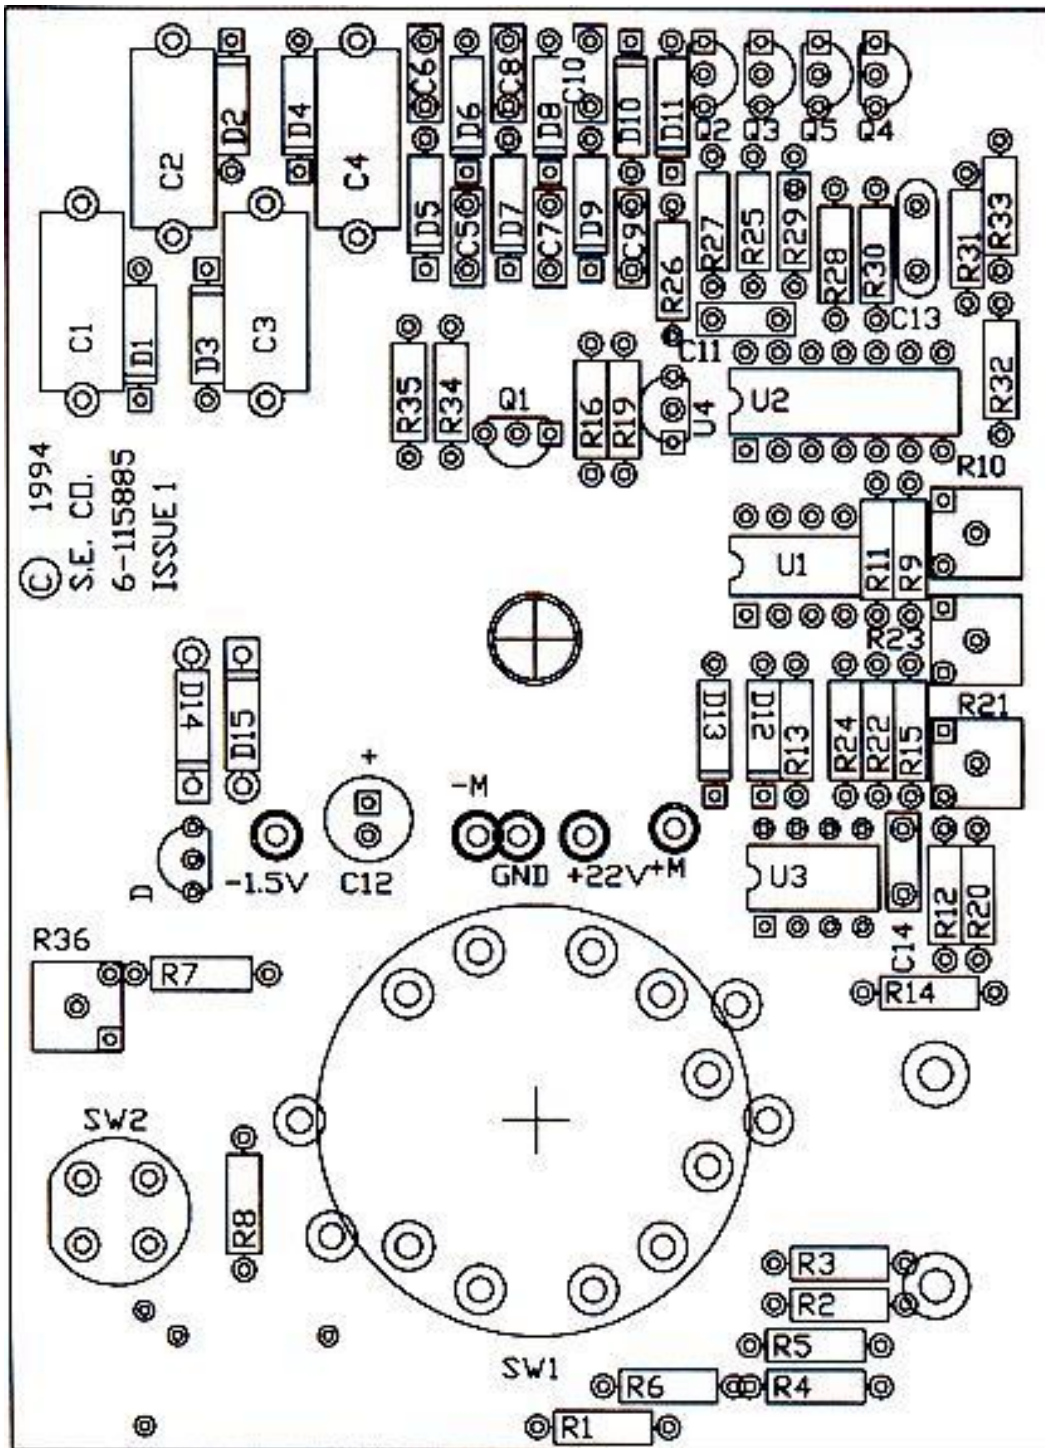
Main PC Board Assembly - Model T00456 3M 701 (Issue 3)
